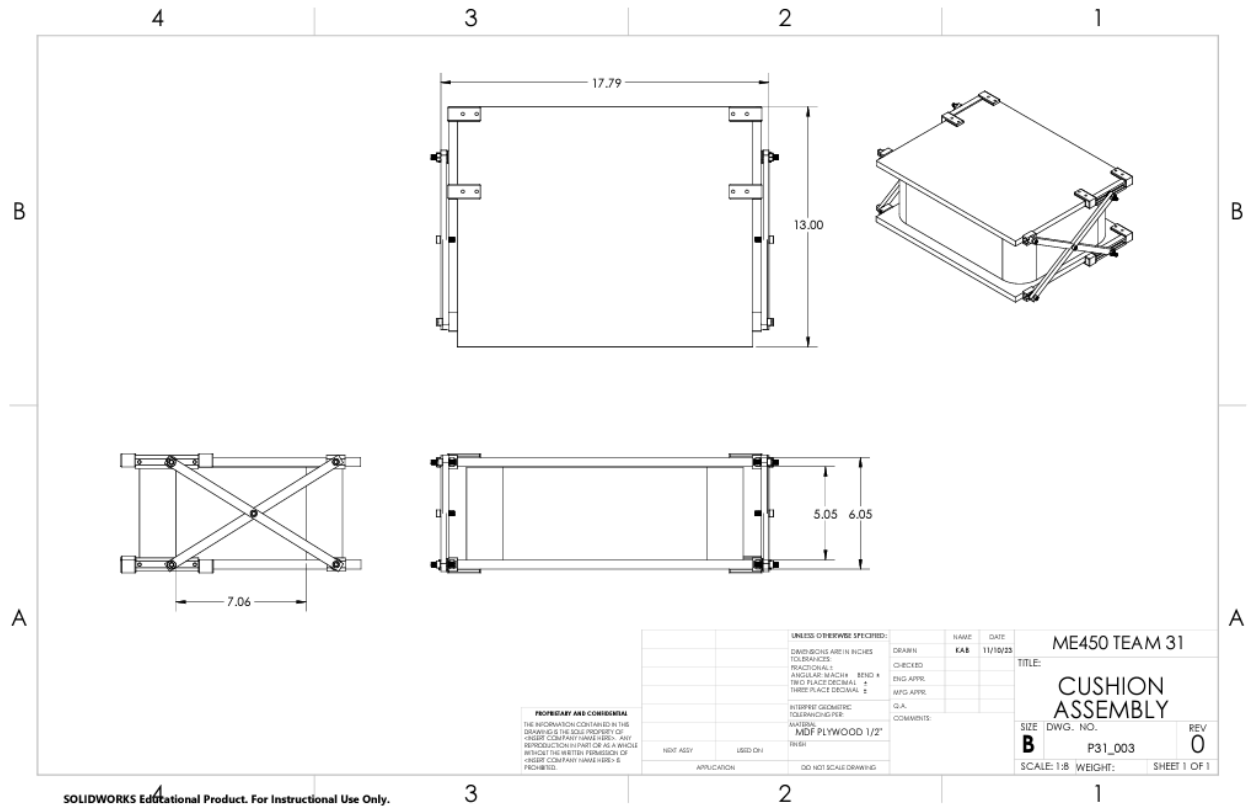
The cushion assembly with overall dimensions. Dimensions for individual components can be found in Appendix E.
